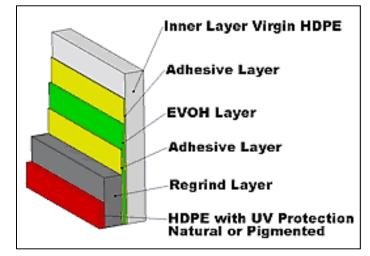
Co-Extruded Fuel Tank Barrier Layers
